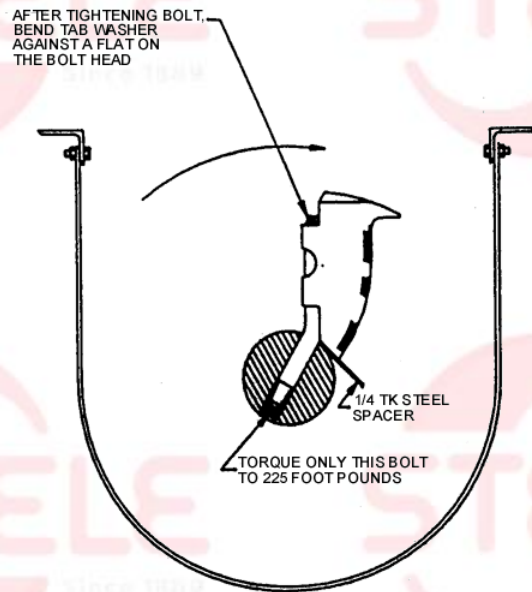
Torqueing the shank bolts then rotating shaft by hand
